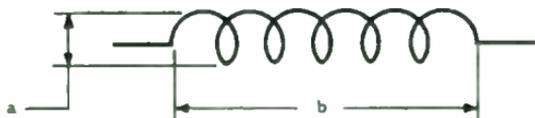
Dimensions of Single-Layer Air-Core Coil
